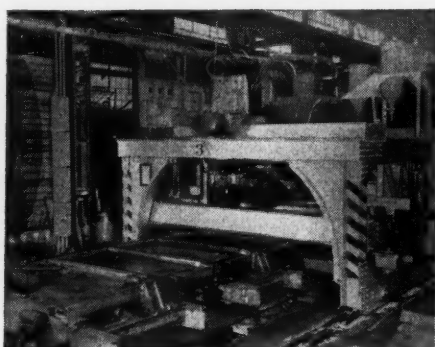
Another typical sub-assembly operation. Arc welding side stakes to side sheets. Two welding heads complete weld on both sides of stake in one pass.
